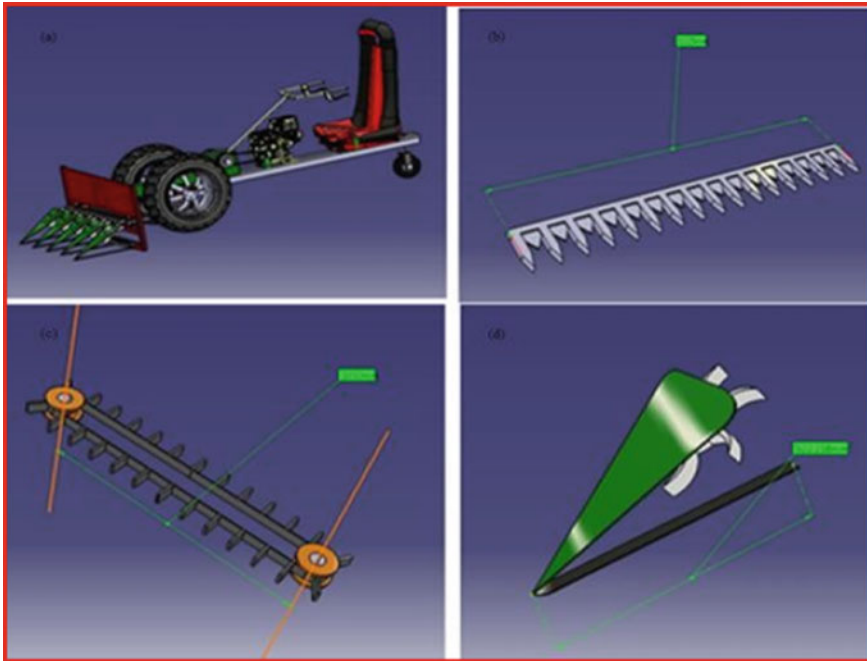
a 3D model of MTLAV with reappear, b Blades, c Conveyer belt, and d Gathering plate attachment
